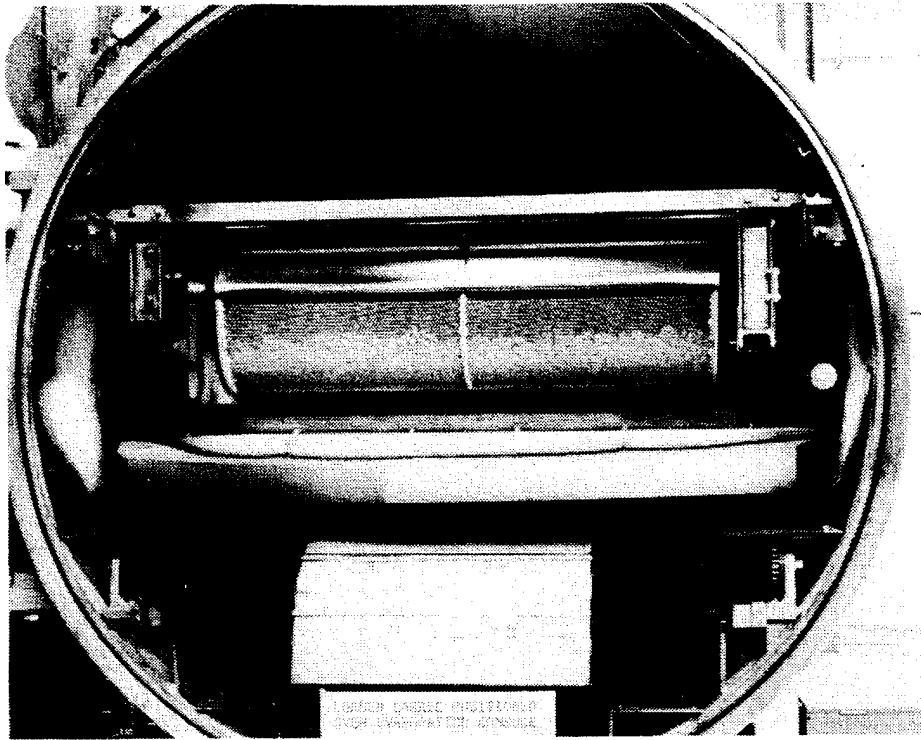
IVD-Aluminum-Coated Fasteners in a Dual Barrel Coater Accessory.
